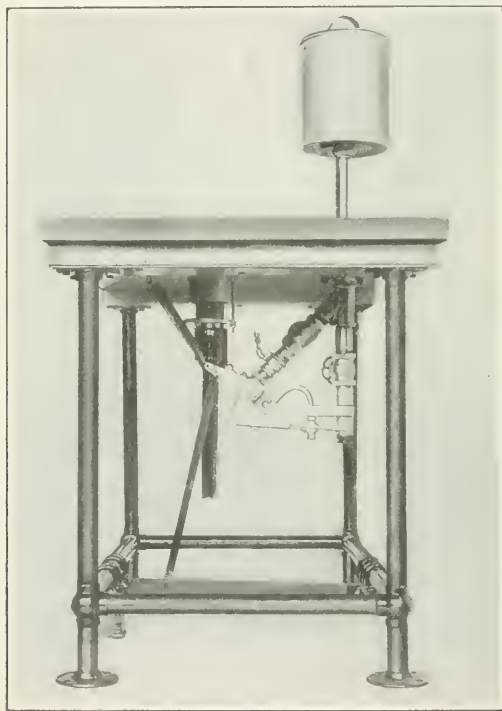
Machine built by Spray Engineering Co. for spraying Interior of High-explosive Shells
